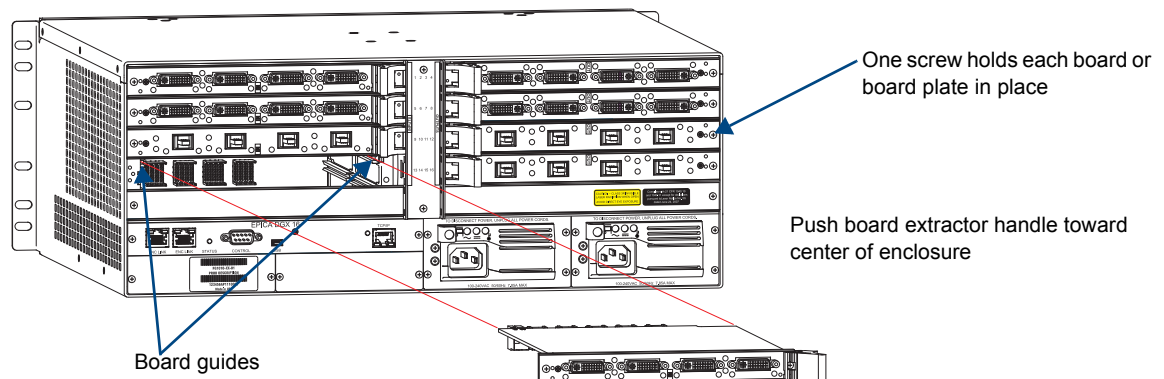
Epica DGX 16 - remove screw, push board extractor handle right (input) or left (output), pull board straight out
